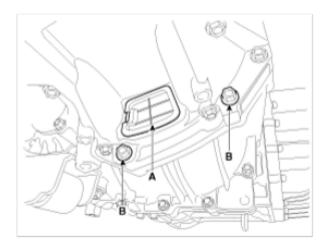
Identifying Dust Cover And Transaxle Mounting Bolts Courtesy of HYUNDAI MOTOR AMERICA
